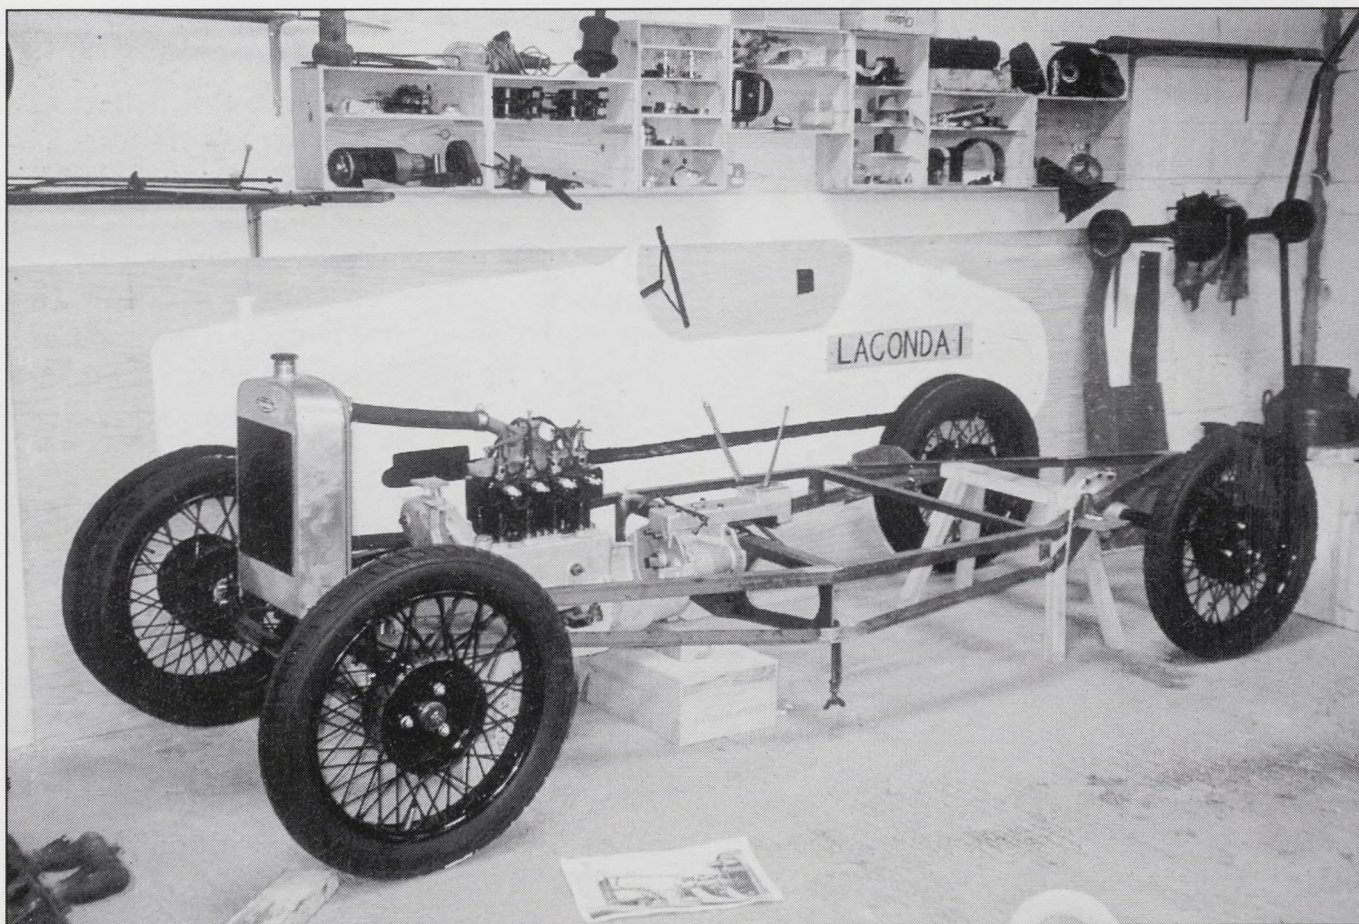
, the black outline on the wall shows where the exhaust should appear.
